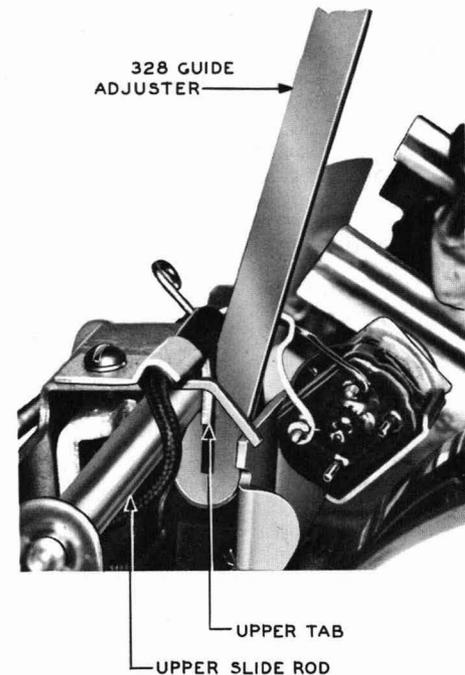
Method of Adjusting Upper Tab for Maximum Clearance
